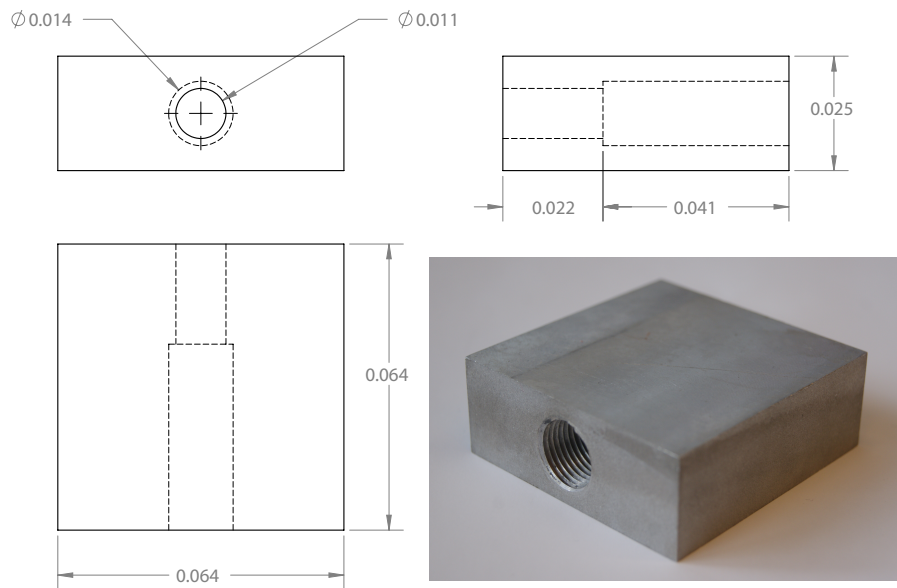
A dimensioned drawing and image is shown of Reactor 1. Units are in meters.
